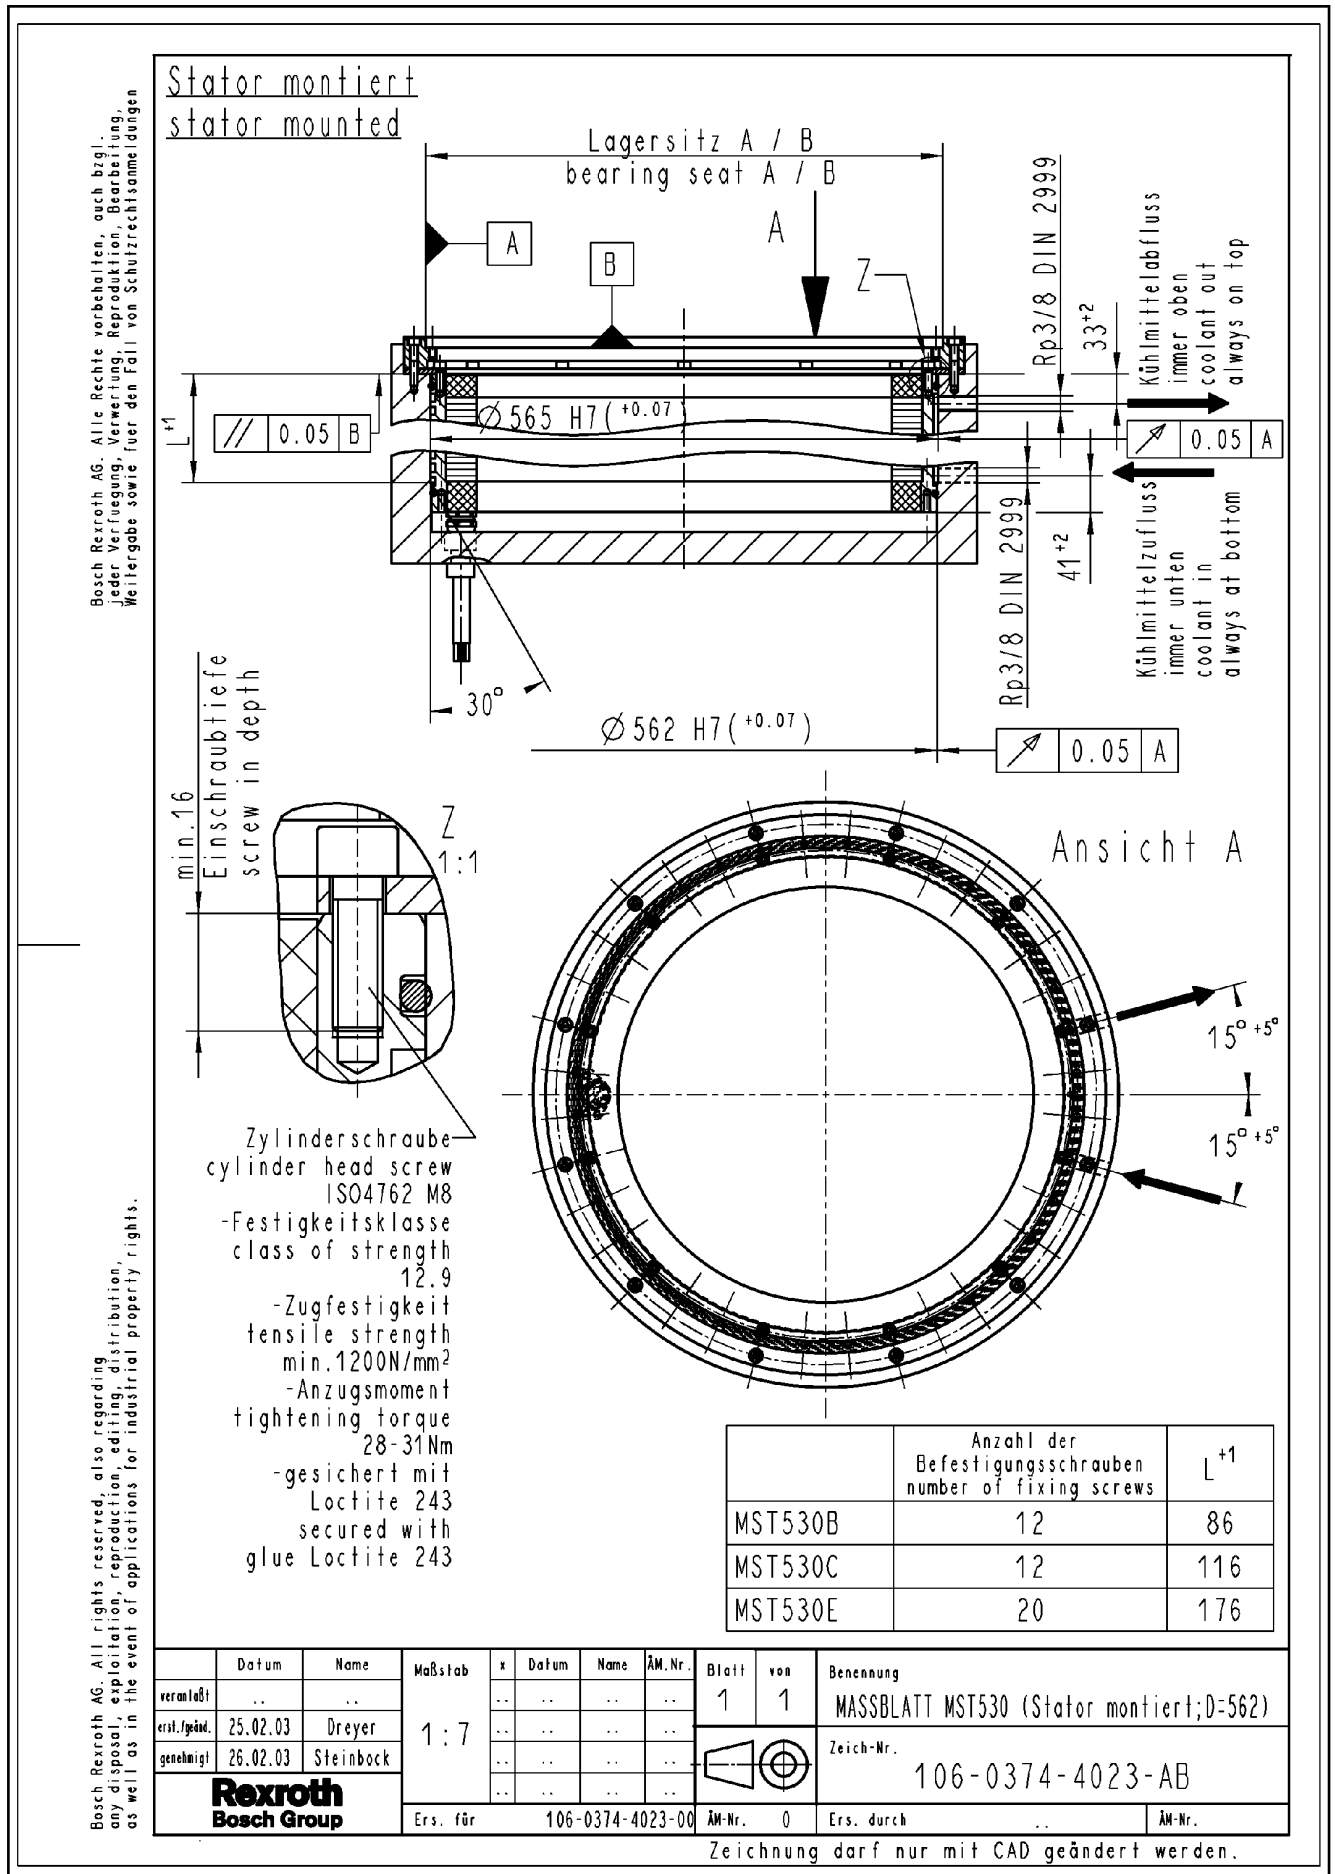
Dimension sheet MST530 mounted, electrical connection "SN"
